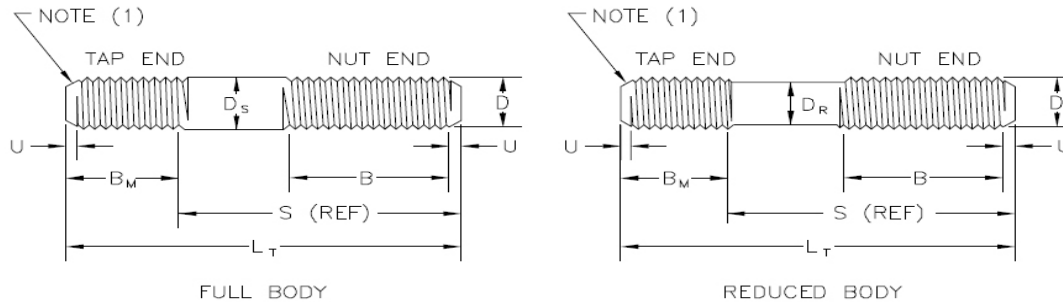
DOUBLE END - CLAMPING TYPE STUD DIMENSIONS<sup>(1)</sup>
